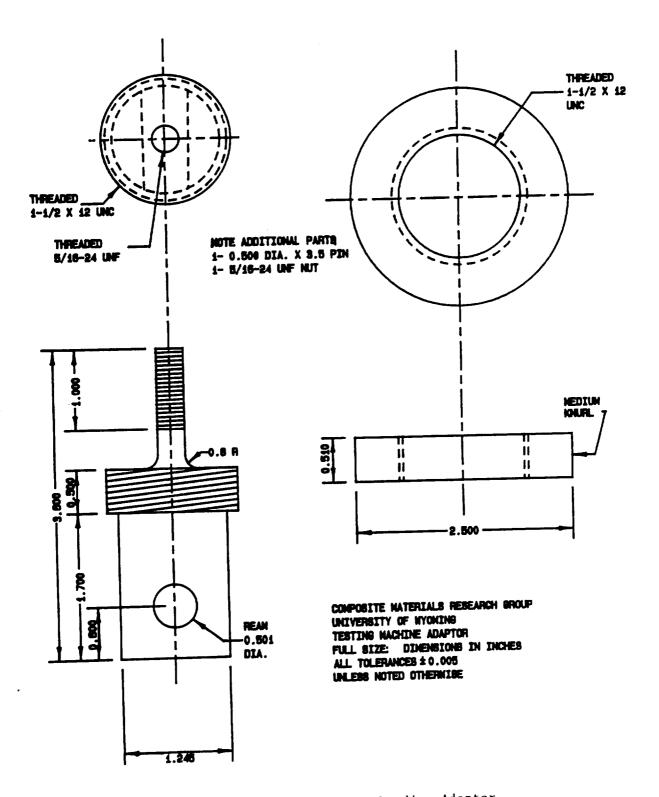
Iosipescu Shear Fixture Loading Adaptor.
